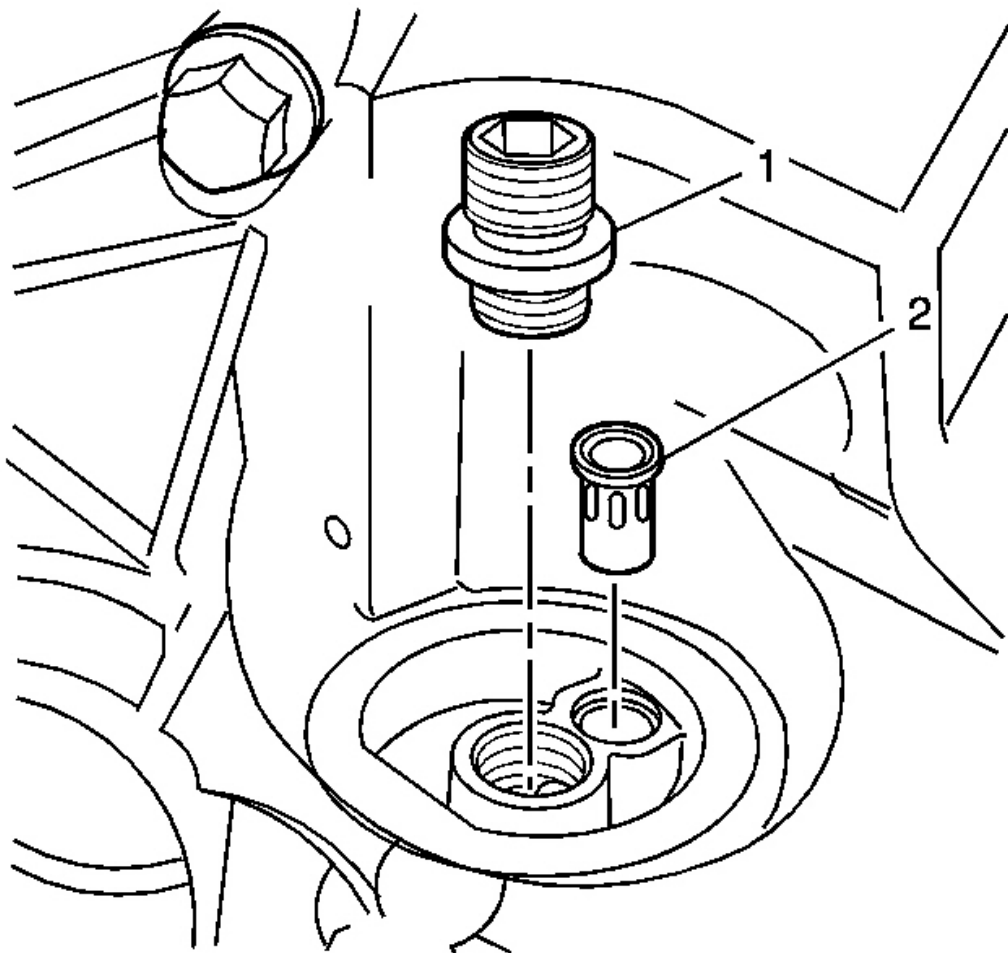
View Of Oil Filter Adapter & Bypass Valve
